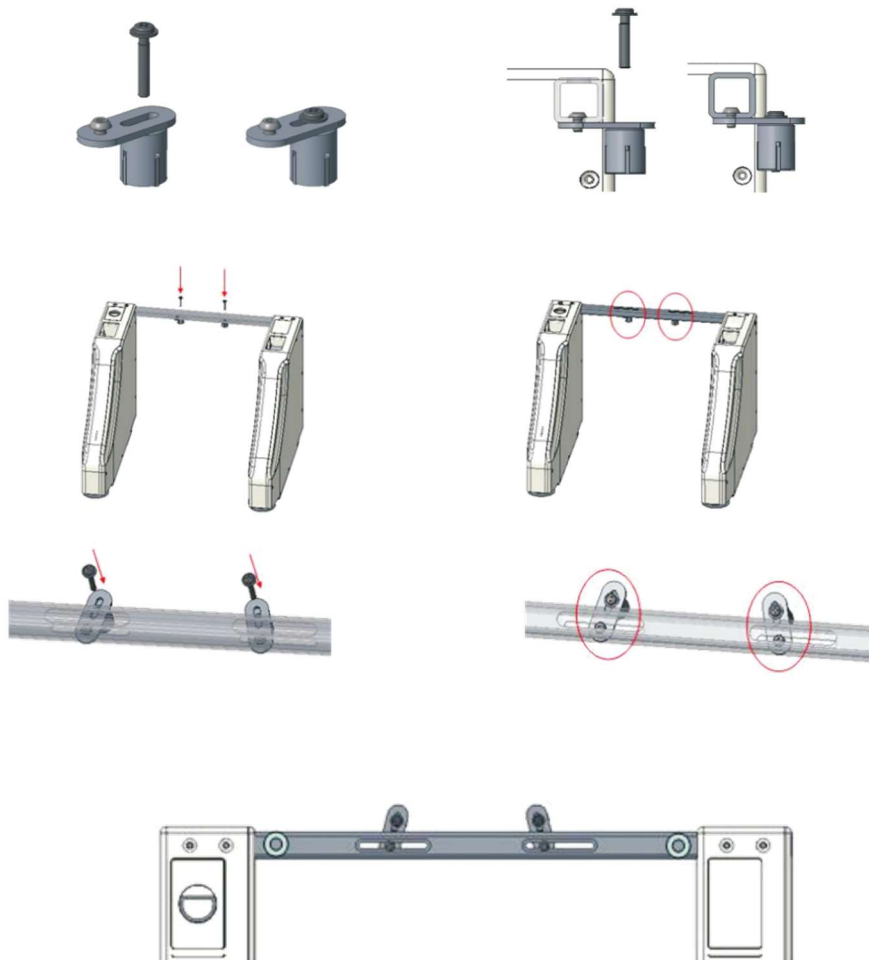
Fix the equipment with the toilet after adjusted the distance by an extension part
